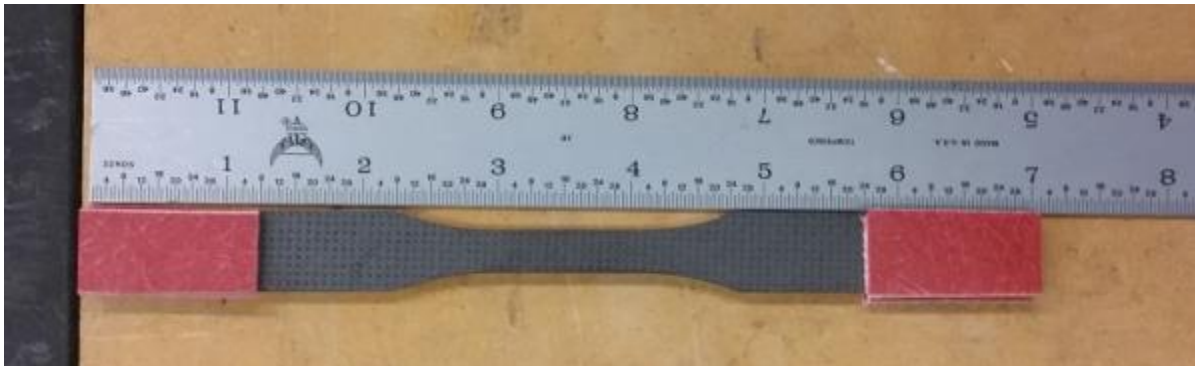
Dogbone shaped test specimen. All dimensions in mm.
